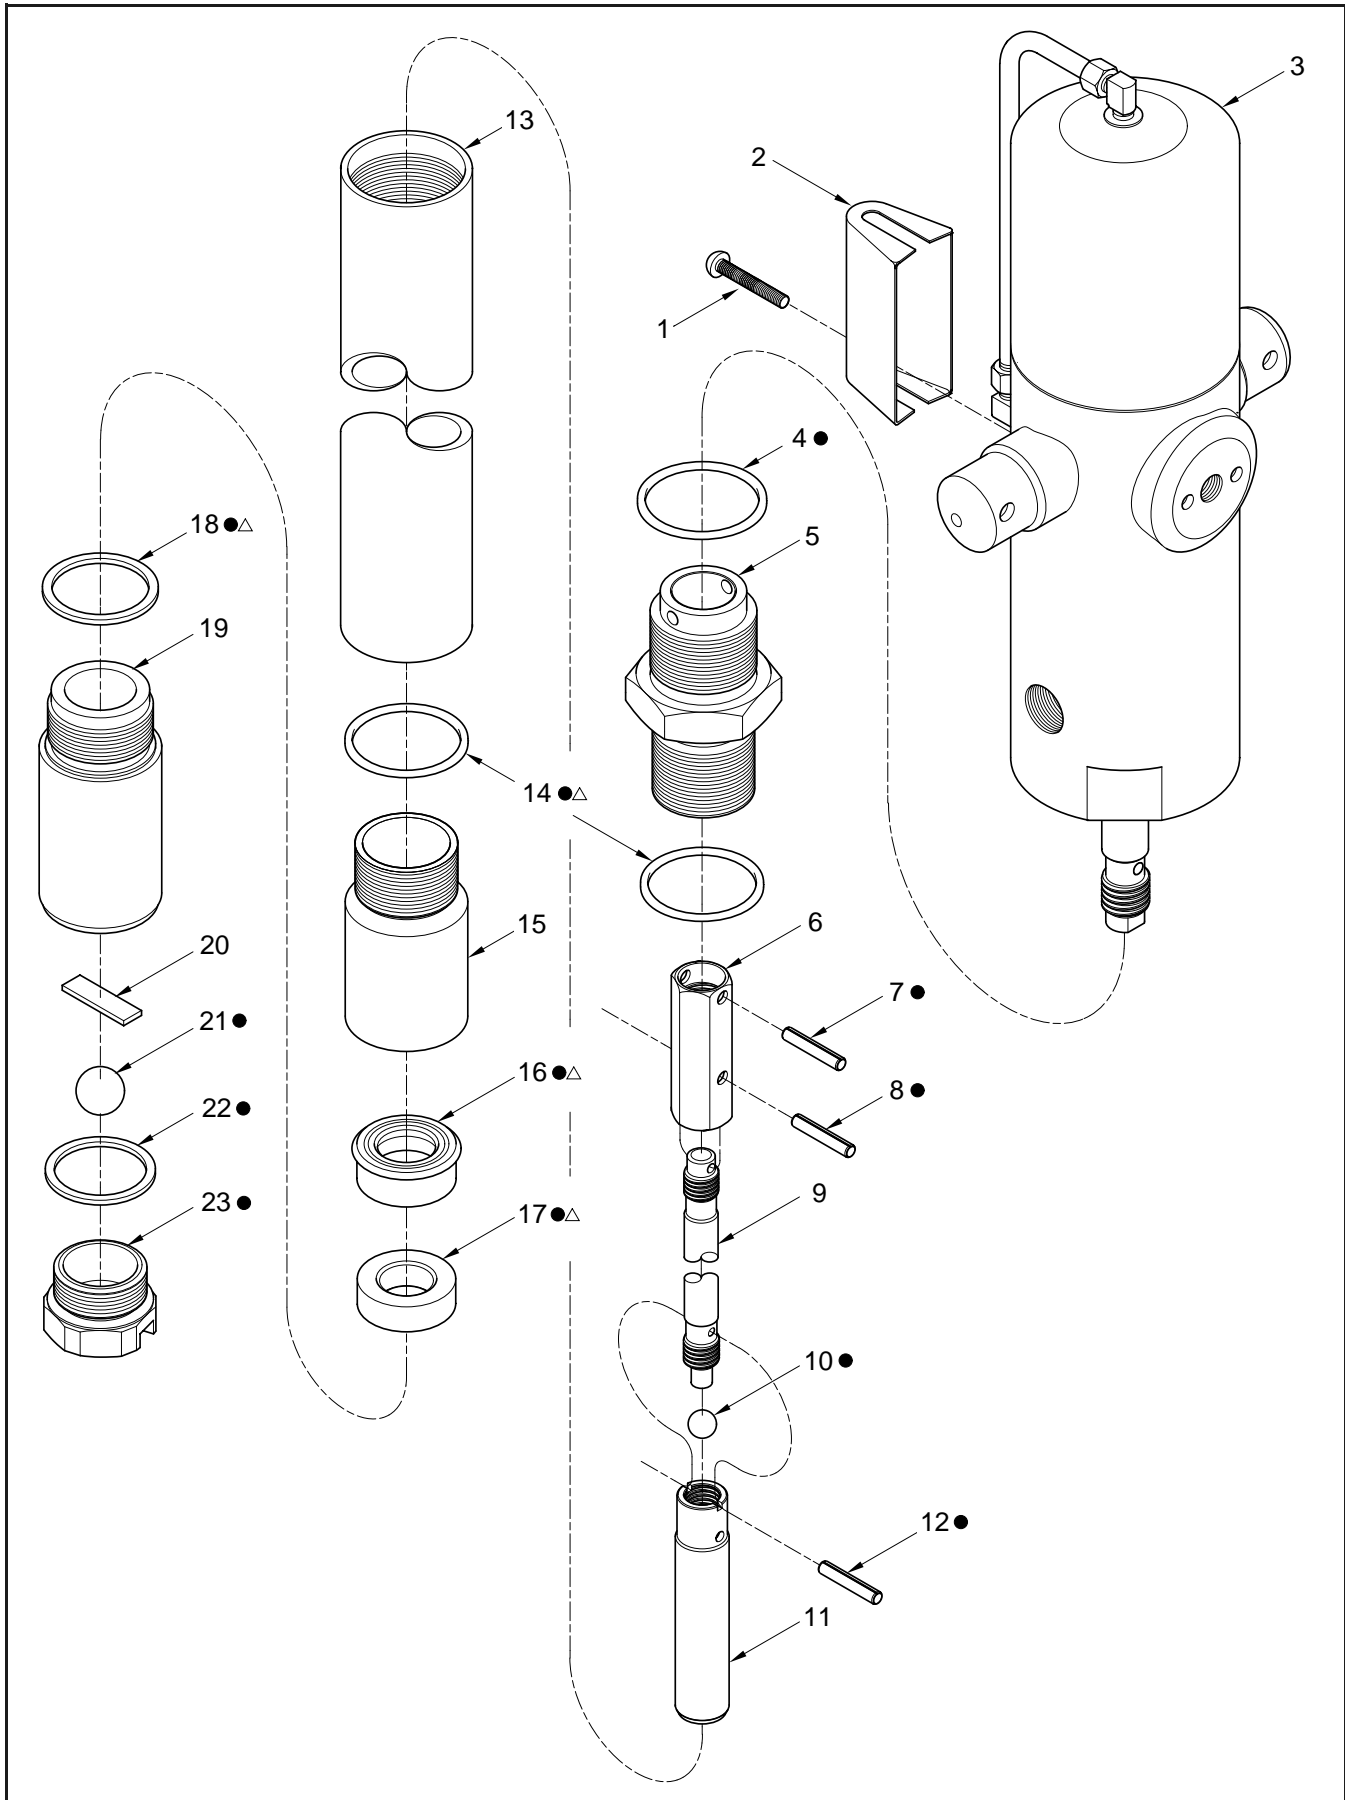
Medium-Pressure Stripped Pump Model 331571 Series - Exploded View
